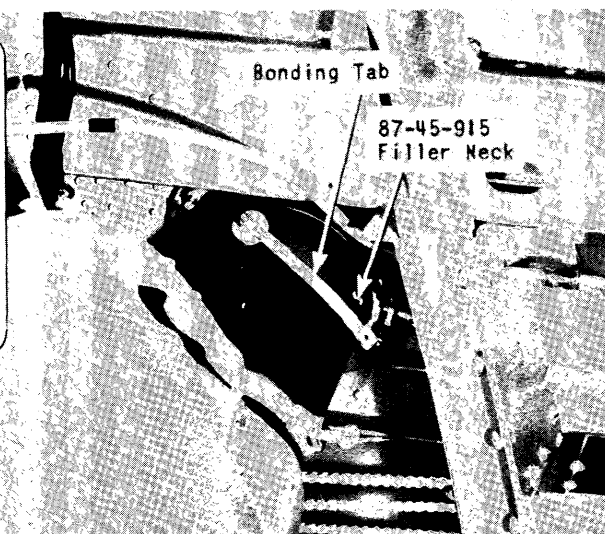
Filler Neck Installation - Fuselage Fuel Tank
